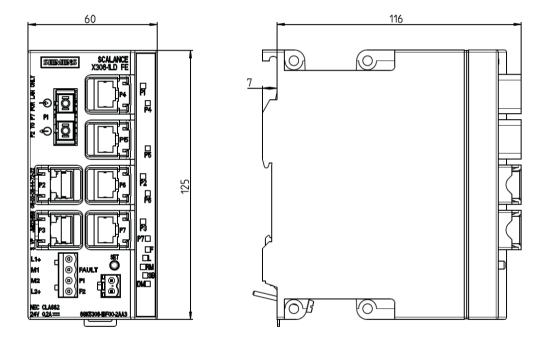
Small design dimension drawing (example used here SCALANCE X306-1LD FE)
